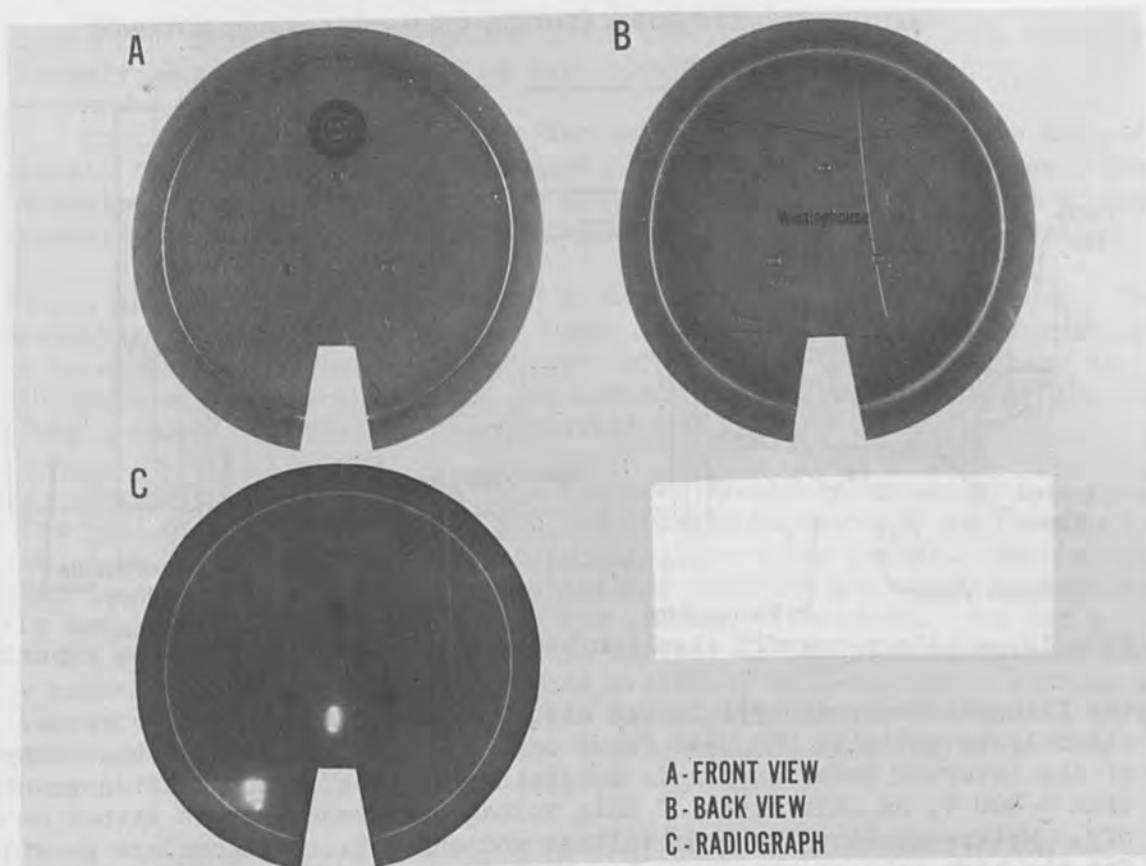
Bead-on-plate weld produced with the battery-powered electron beam welder.
